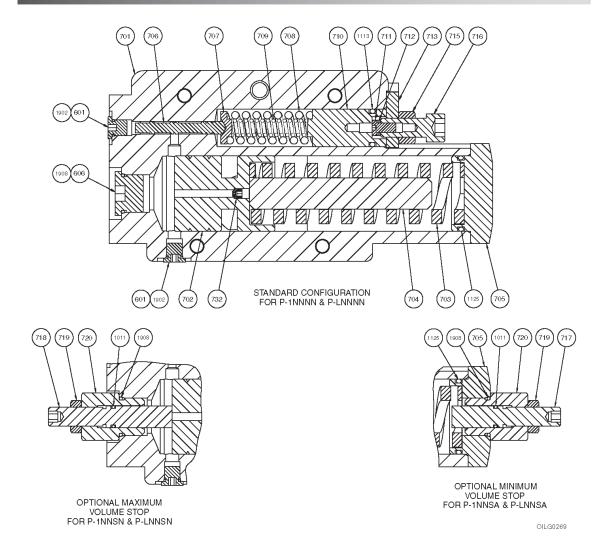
Parts Drawing for "P-1NN" and "P-LNN" Control (519975-201 sheet 1)
